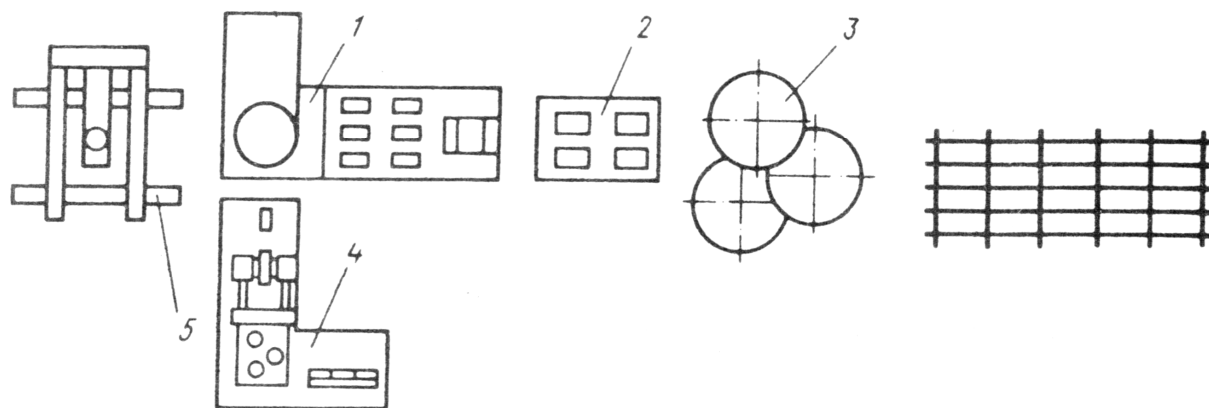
Automatic line for welding of bar mat reinforcement with pitch 50 mm: 1 - welding machine; 2 - straightening device; 3 – reel stand; 4 - mechanism for cross-feeding of reinforcement; 5 - dropper-packager.
